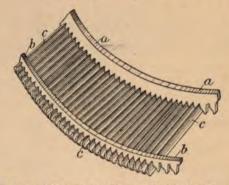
Blades and Shrouds of a Parsons Radial-flow Steam Turbine.
